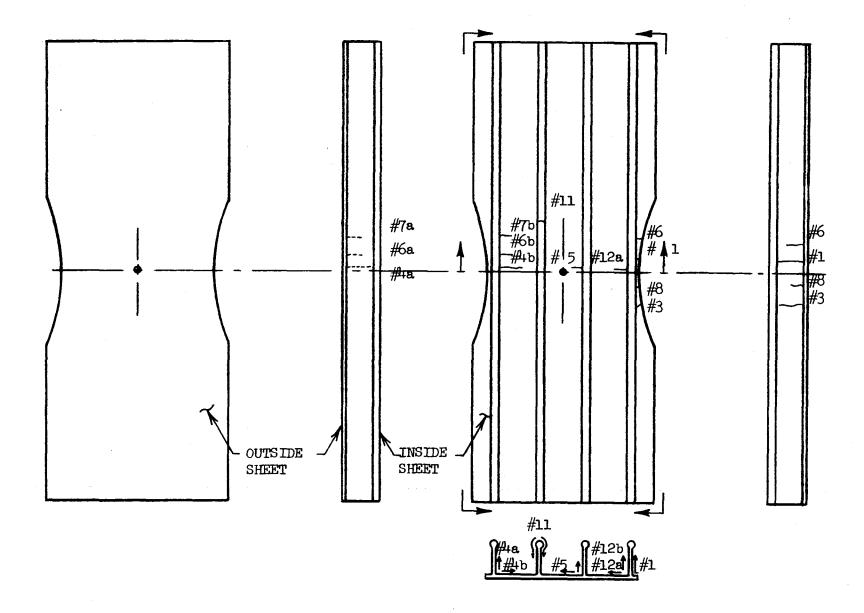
SECONDARY CRACK LOCATIONS ALUMINUM-GRAPHITE PANEL #15C
